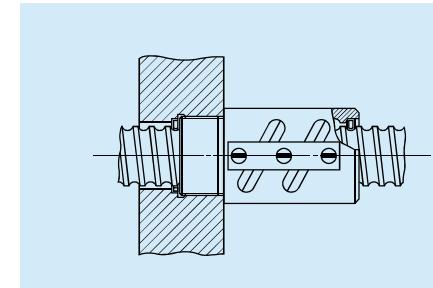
Installation of brush-seal to a ball nut with thread screw
